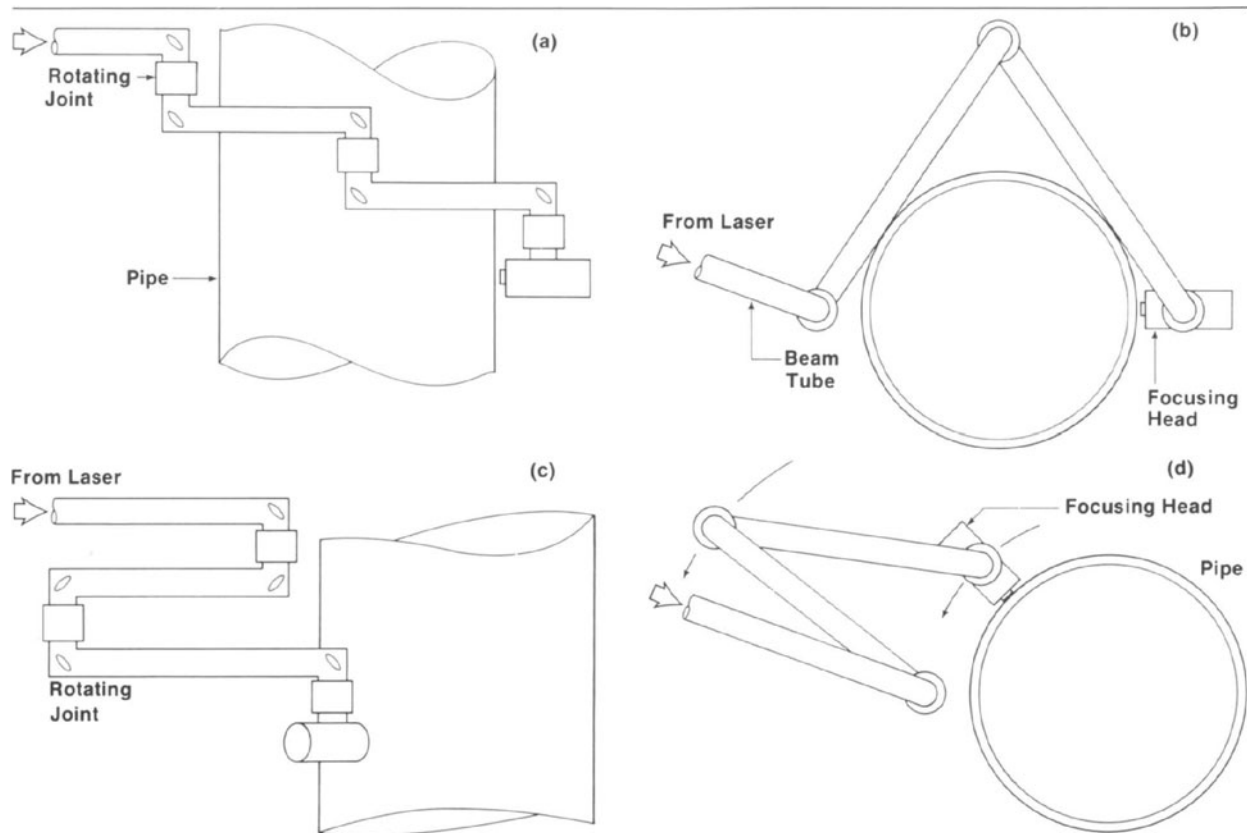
A proposed beam-delivery system for laser welding of a stationary pipeline from a stationary laser, using a moving beam system. (a) and (c) give top views; (b) and (d) end views. With the laser in the nine o'clock position, (a) and (b) show welding in the three o'clock position and (c) and (d) welding in the 11 o'clock position. Each joint consists of two mirrors; the upper joint is slaved to the motion of the welding head.
